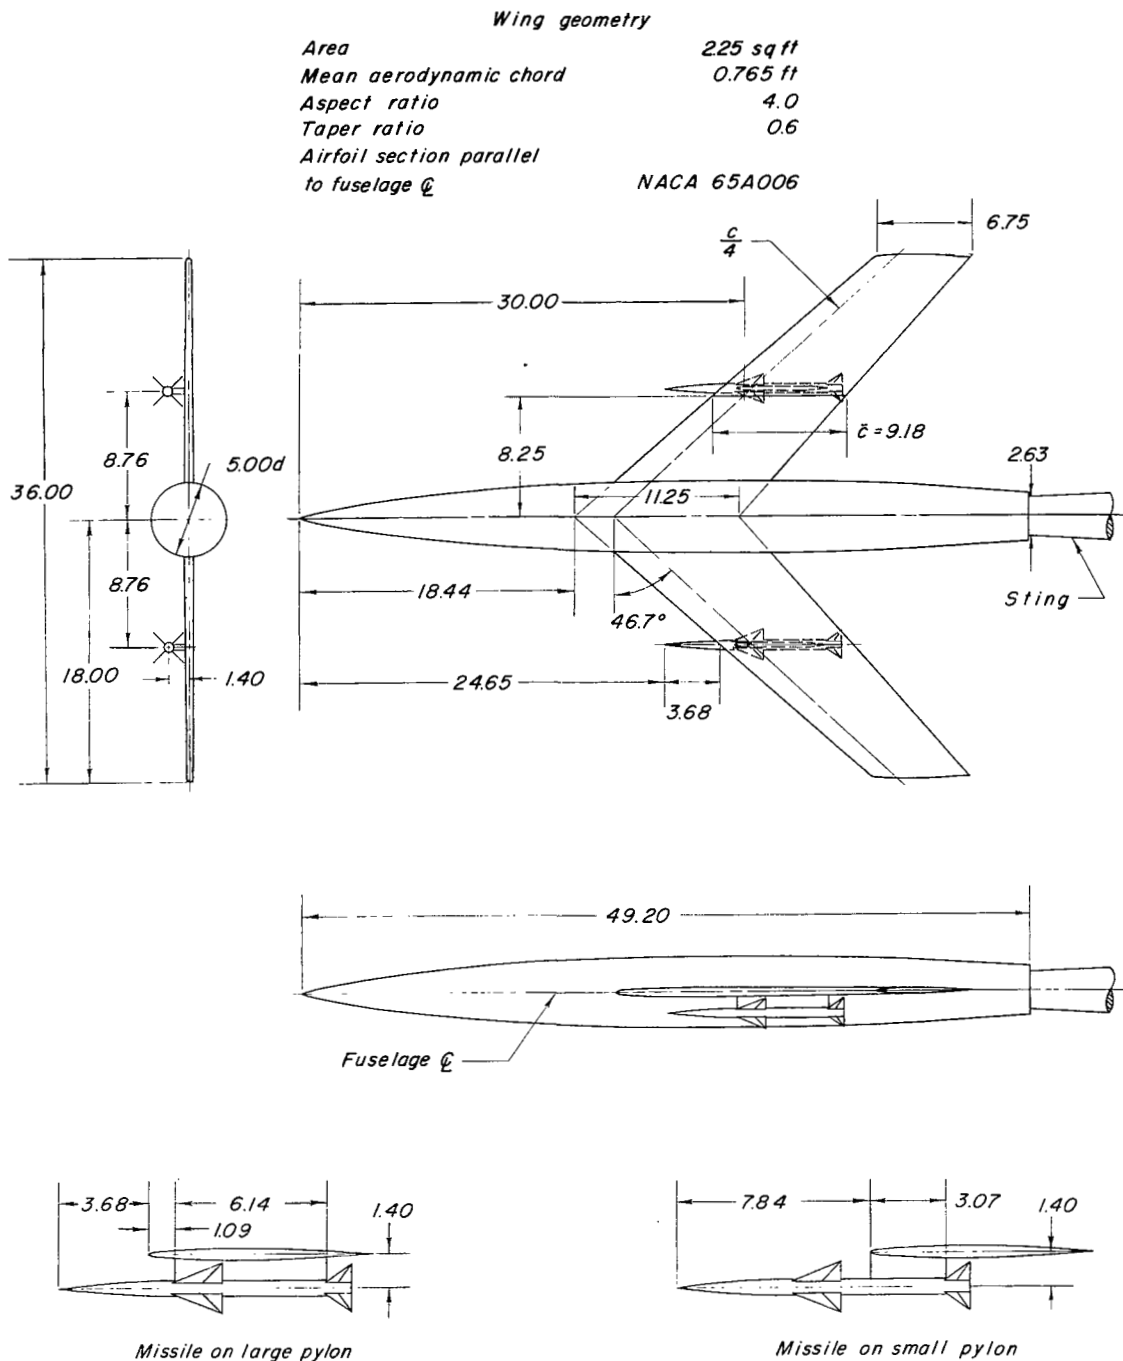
Three-view drawing of model A with pylon-mounted missiles.
